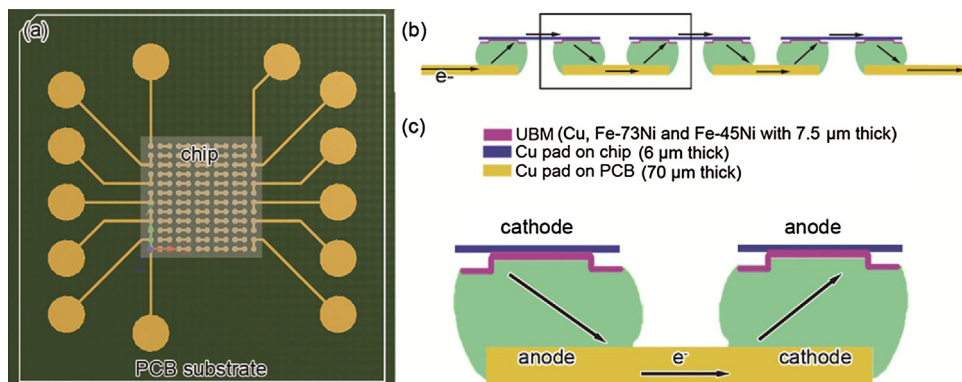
Test vehicle (a) the PCB substrate, (b) the electric flow within daisy-chain design, (c) the cross section of a pair of solder joints.
